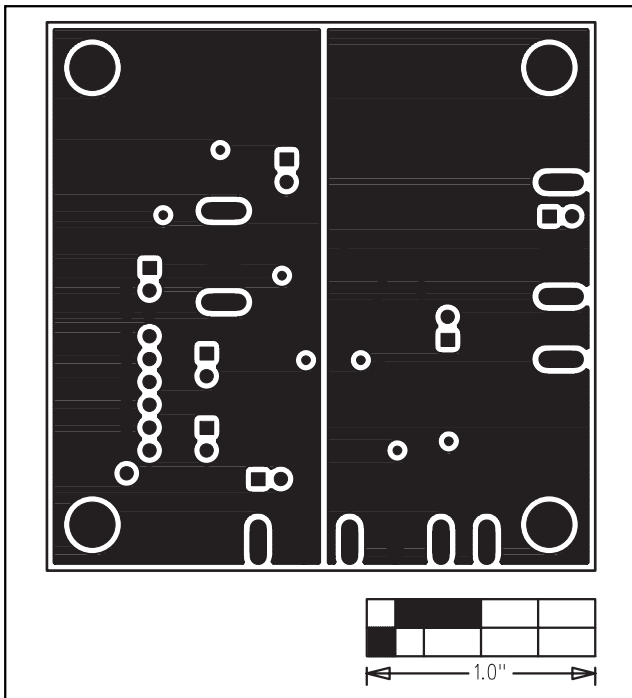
MAX1169 EV Kit PC Board Layout—Inner Layer 2 (GND)
